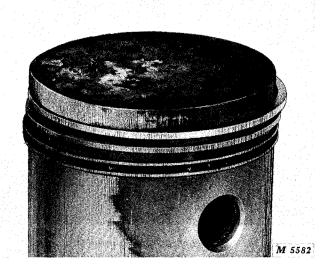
Scratched Ring Faces Caused by Abrasives in the Engine
